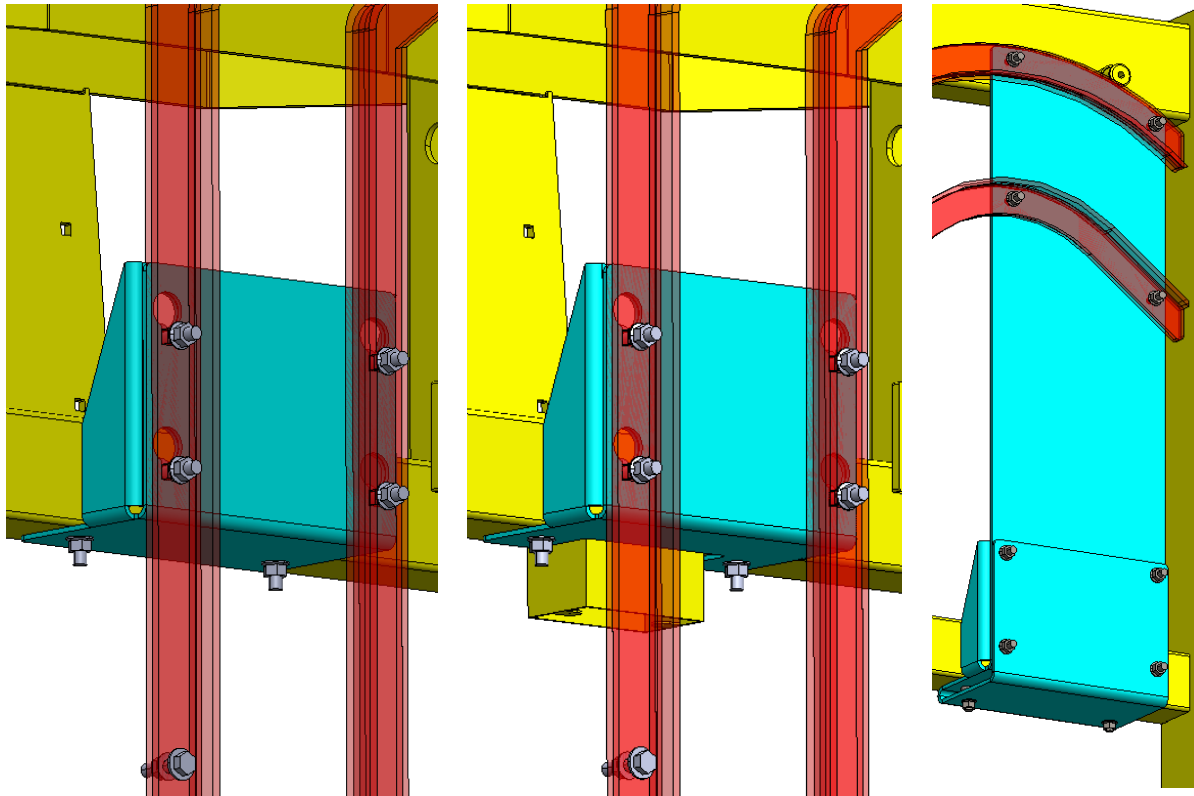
FRONT VIEWS OF BRACKET 8R (LEFT), BRACKET 8L (MIDDLE), AND BRACKET 9 (RIGHT).
